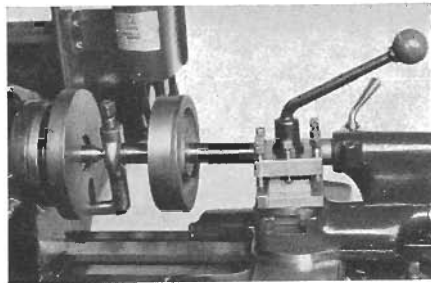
Same Gear Blank mounted on Lathe Mandrel for Final Operation
